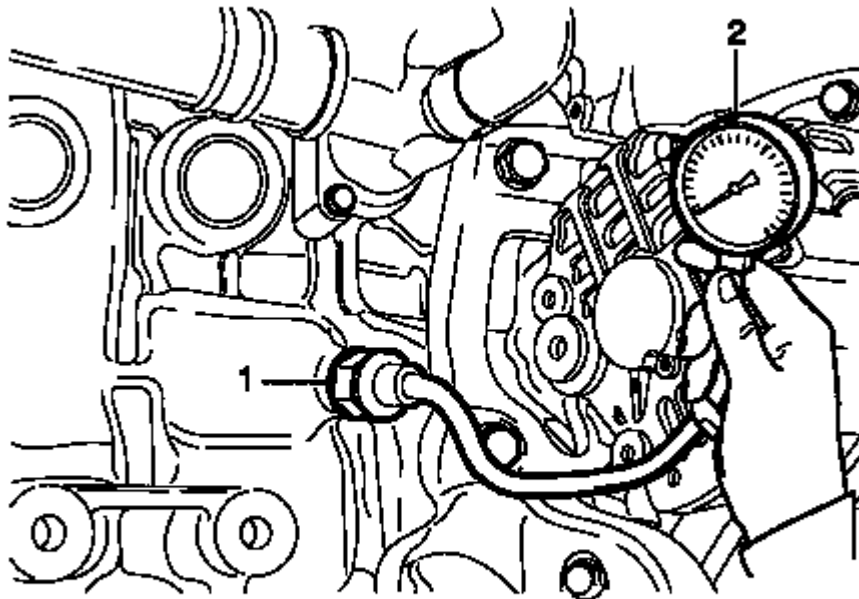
Installing EN-21867-850 adapter Oil Pressure Check
